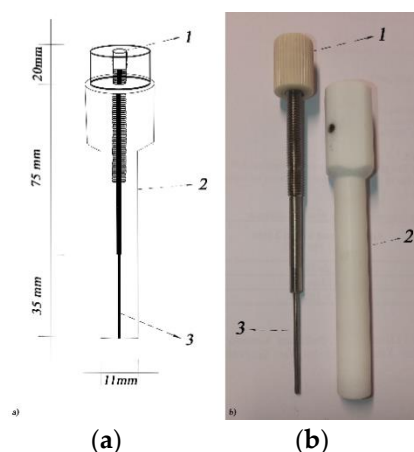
(a) Scheme of assembled Teflon holder; (b) Image of dissembled laboratory made Teflon holder (1-coaxial cable slot, 2-Teflon body, 3-stainless-steel rod of diameter of 2 mm).
